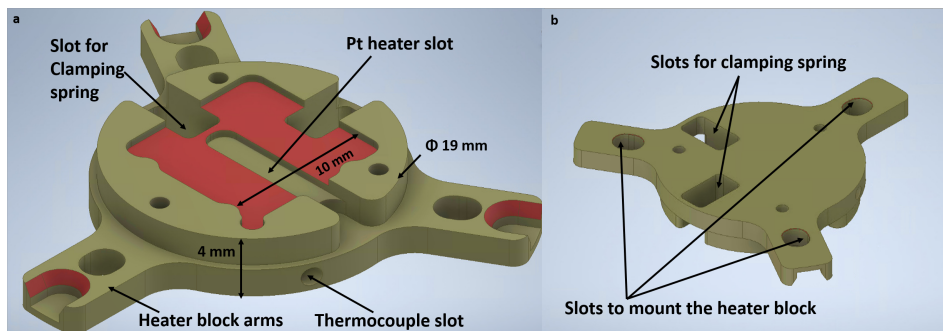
a) CAD drawing depicting the heater block having a slot for the Pt heater, two slots for clamping springs and a slot for a thermocouple to measure the temperature of the heater block.
